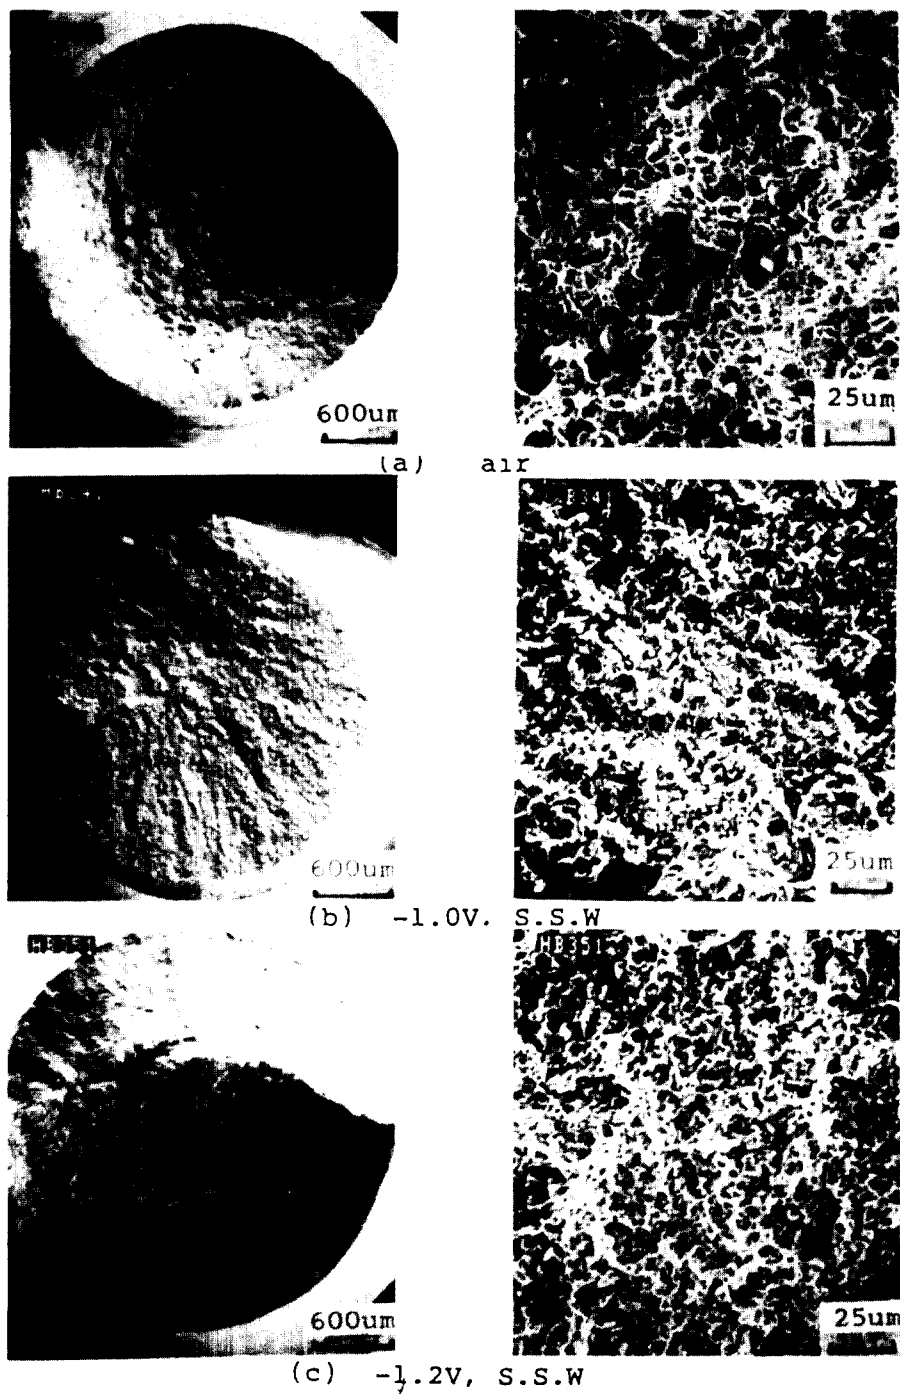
Micrographs of fracture cross-section and surfaces of SCM440 welded joint under cathodic protection in S.S.W. and in air
